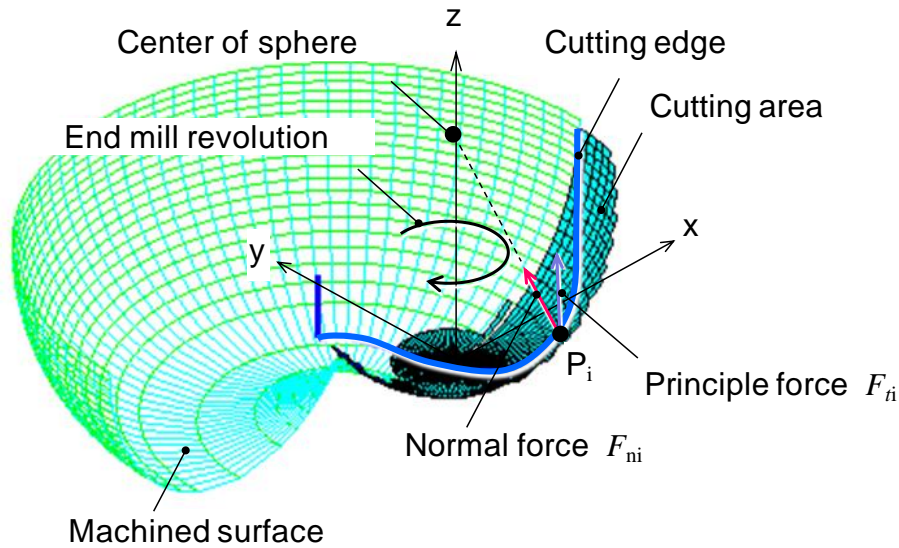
13 Cutting force direction in helical milling with a ball end mill.
